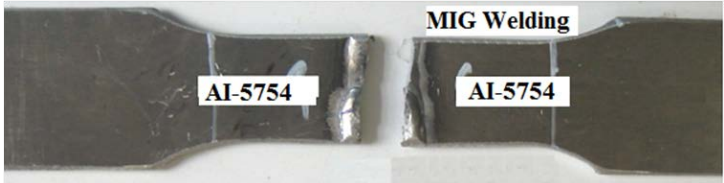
Tensile test fracture surfaces Al 5754 GMAW weld material
